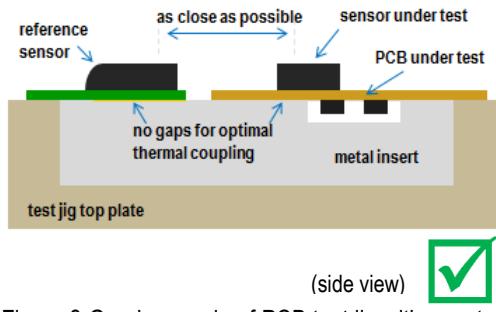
Good example of PCB test jig with a metal insert, ensuring good thermal coupling between the reference sensor and the sensor under test as well as a minimum distance between them.
